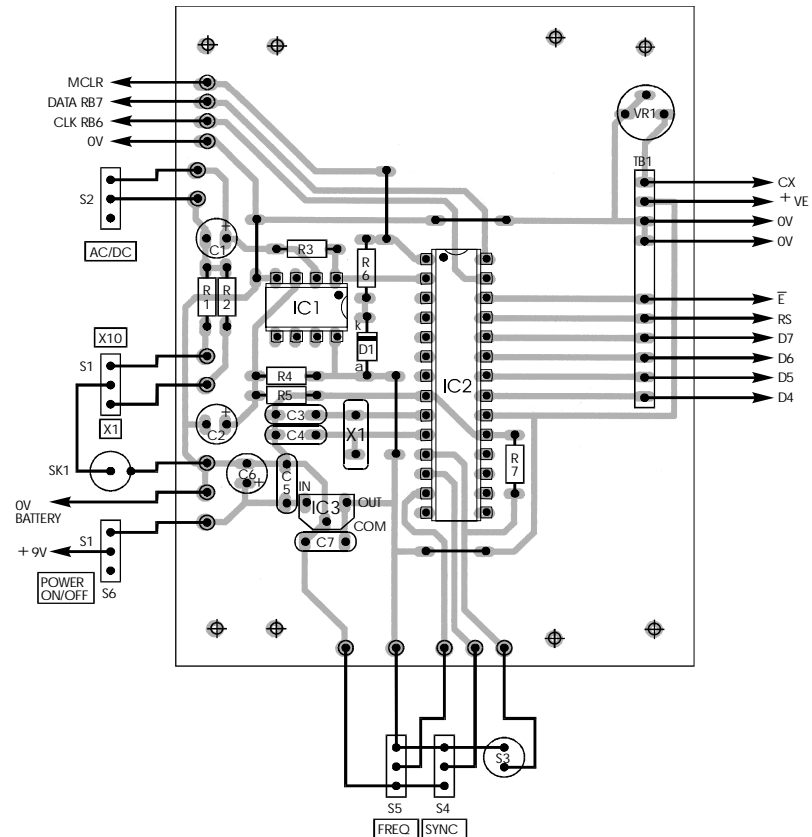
Printed circuit board component layout, wiring to the off-board components and (approximately) full-size copper foil master for the Micro-PICscope.
